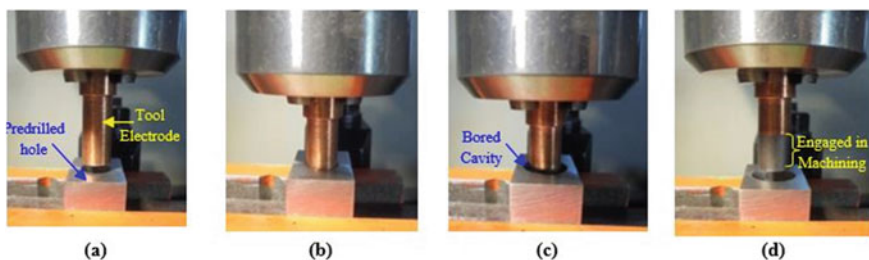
Experimental procedure. a Predrilled cavity and tool electrode. b Tool electrode at full depth. c At the end of boring operation. d Bored cavity and tool wear
